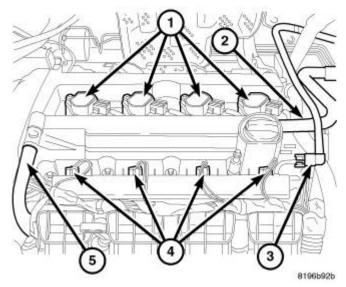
Ignition Coils, Air Hose, Fuel Line, Injectors & PCV Hose Courtesy of CHRYSLER GROUP, LLC
